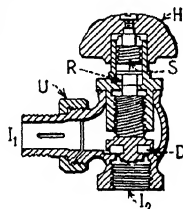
Steam radiator-inlet valve with rubber packing.
